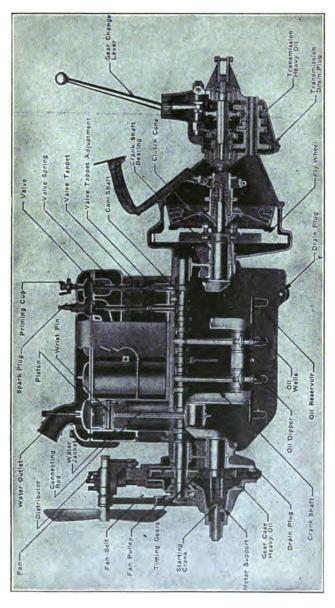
Part Sectional View of Dort Four Cylinder Unit Power Plant, Showing Important Parts of Motor, Clutch and Change Speed Gearing,
